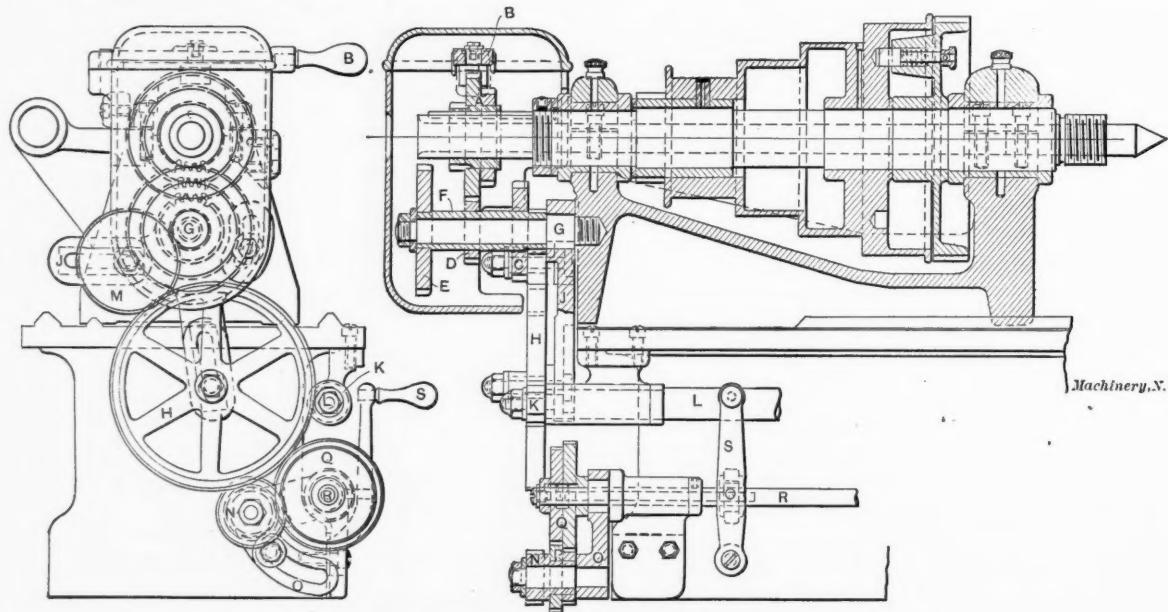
End View and Section through Head-stock, showing Feed Connections.
